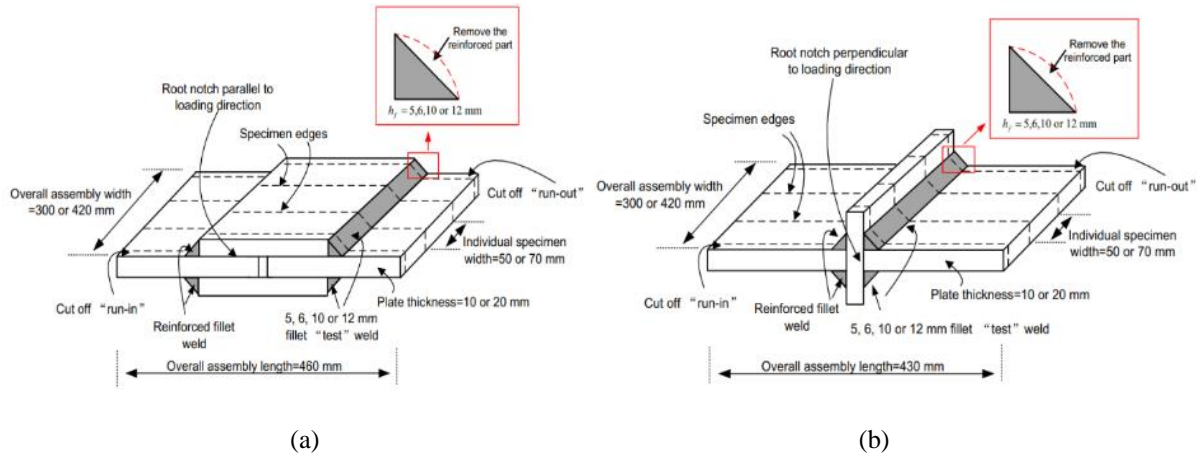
(a) Transverse lap-welded fillet joint (b) cruciform fillet joints [37].
